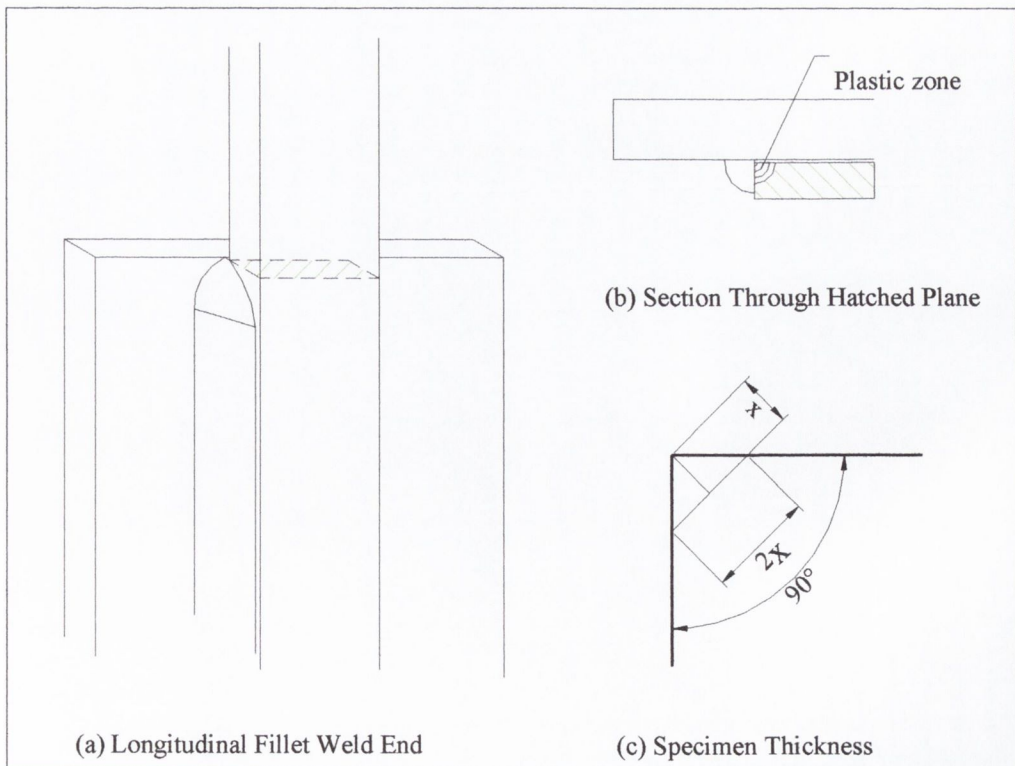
Failure from the end of a longitudinal fillet weld (Fillet-A)
